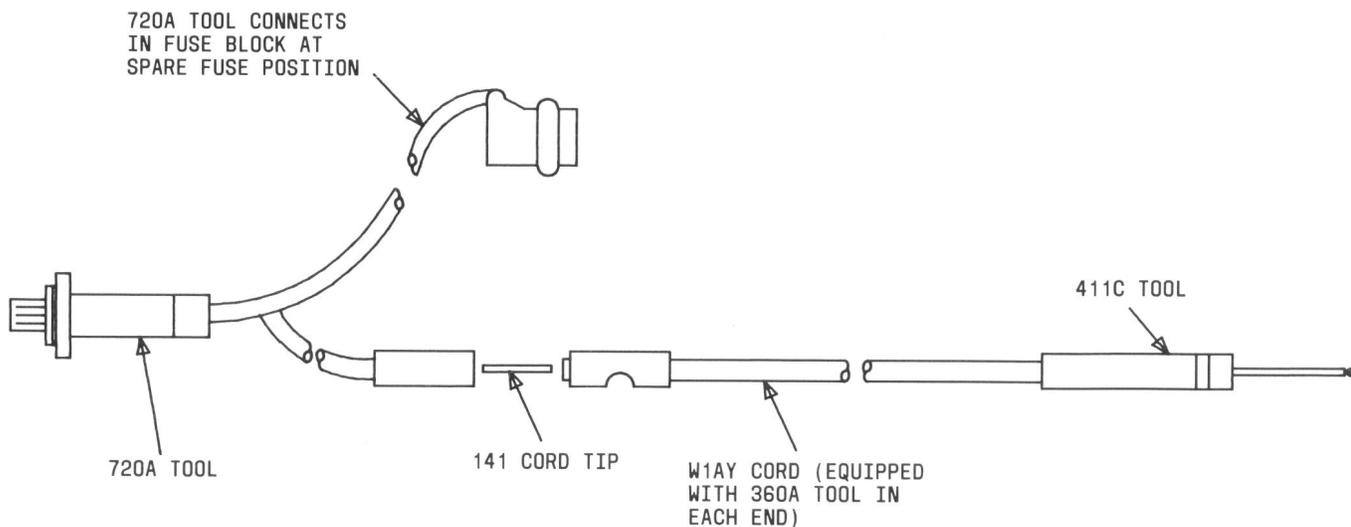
Fuse Alarm Testing Cord—Tool Connection
